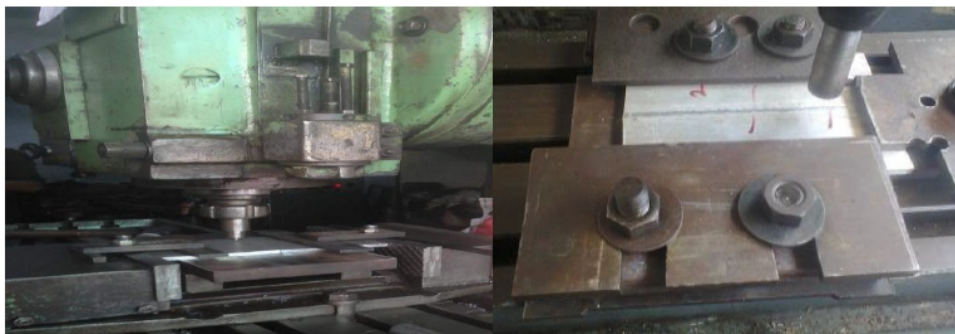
Vertical Milling Machine (Make HMT)
